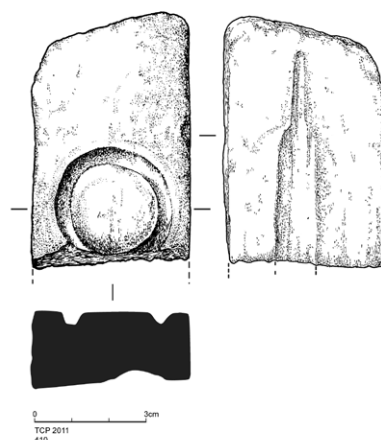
Mould 1 showing matrix 1a (left) and 1b (right) (Drawing by Craig Williams).
